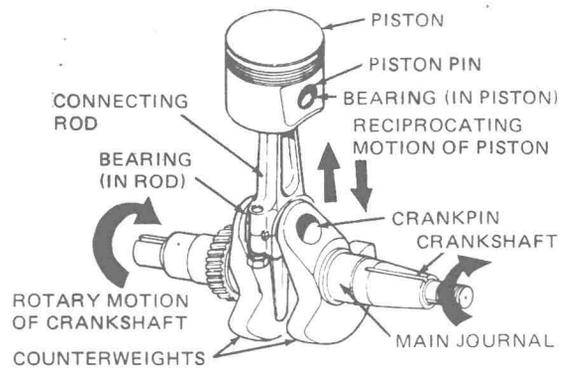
The crankpin moves in a circle around the crankshaft while the piston moves up and down.
